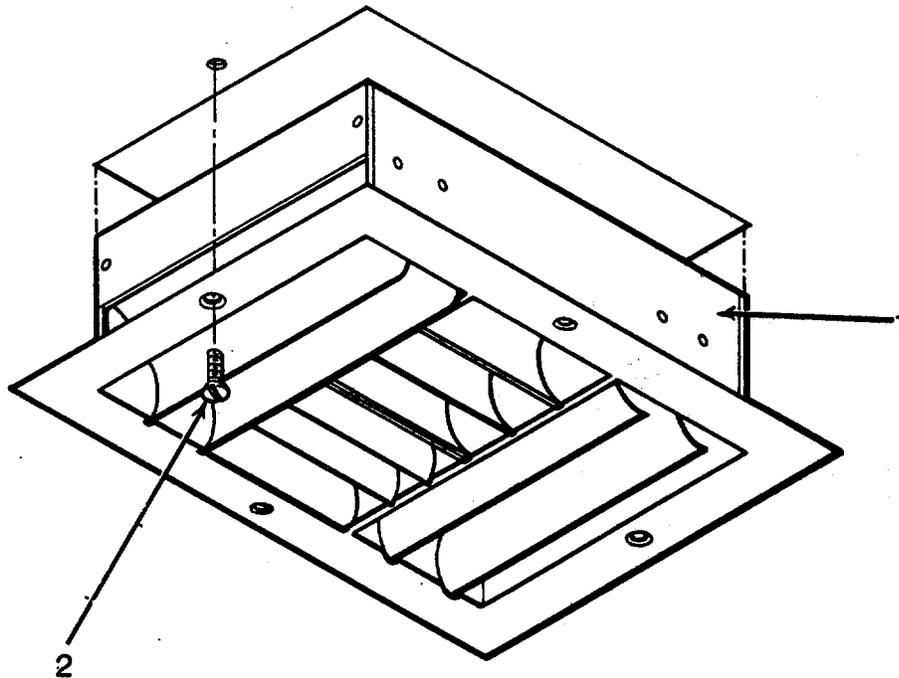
Air Conditioner Ducting Assembly 4-Way Register
